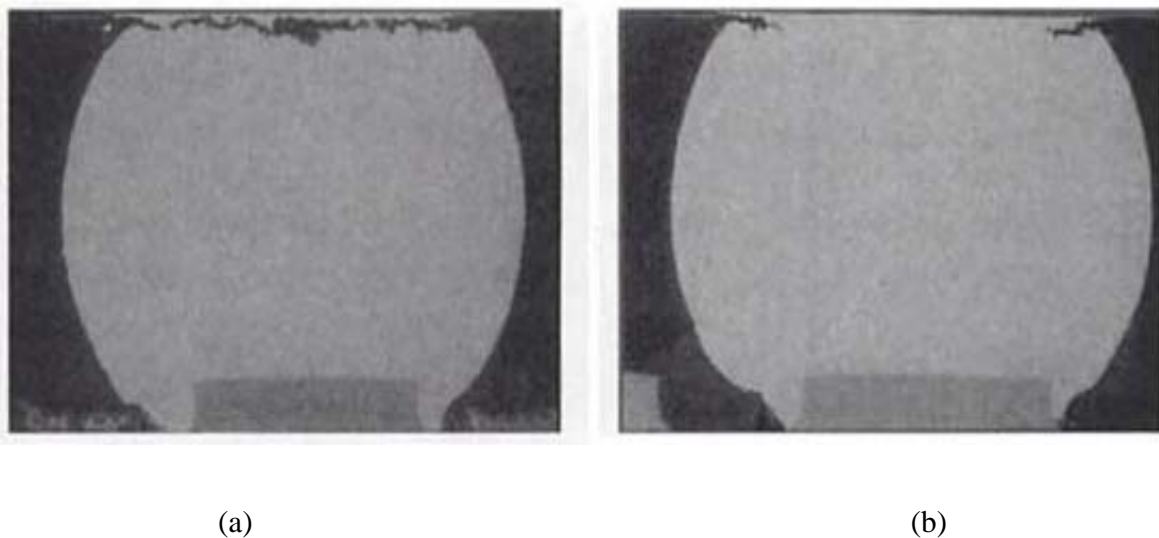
(a).Thermal fatigue failure of UltraCSP solder ball and (b). Partial thermal fatigue failure of UltraCSP solder ball from Flip Chip technologies
